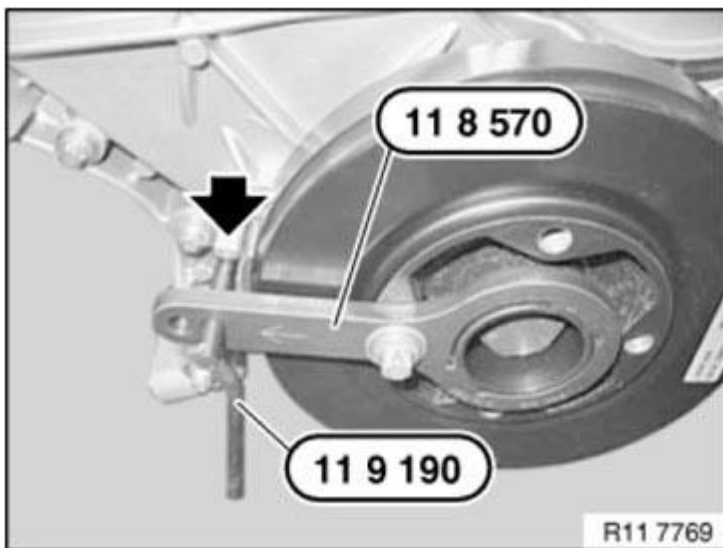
Securing Vibration Damper With Special Tool 11 9 190
